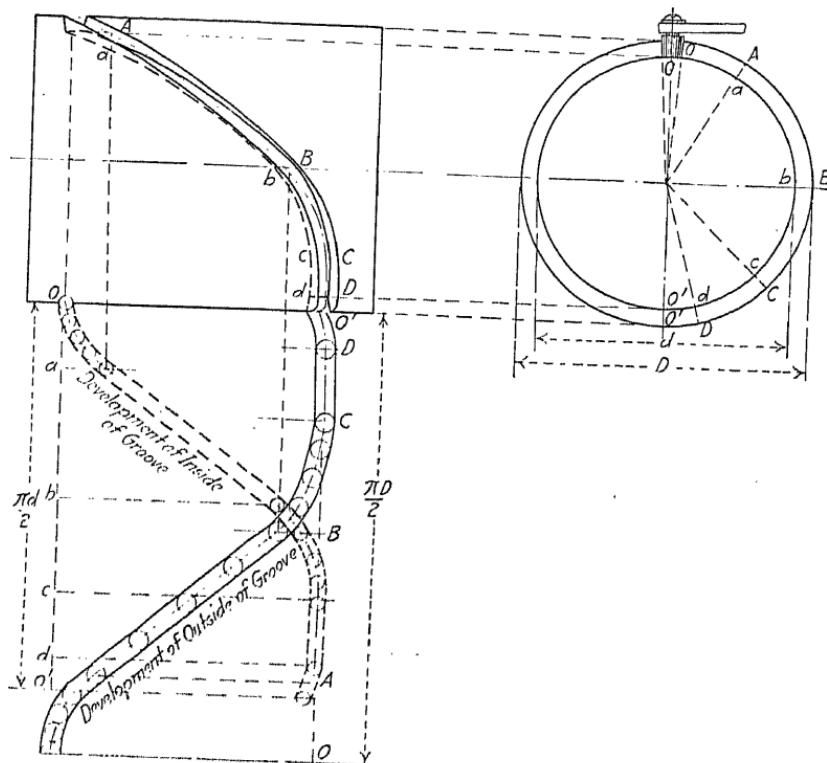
The exact method of drawing the groove outlines of a cylindrical cam.
